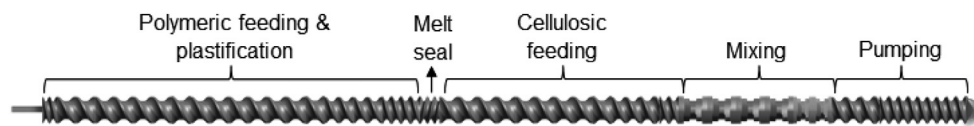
The screw design showing the different screw elements from inlet (left) to the die (right)
